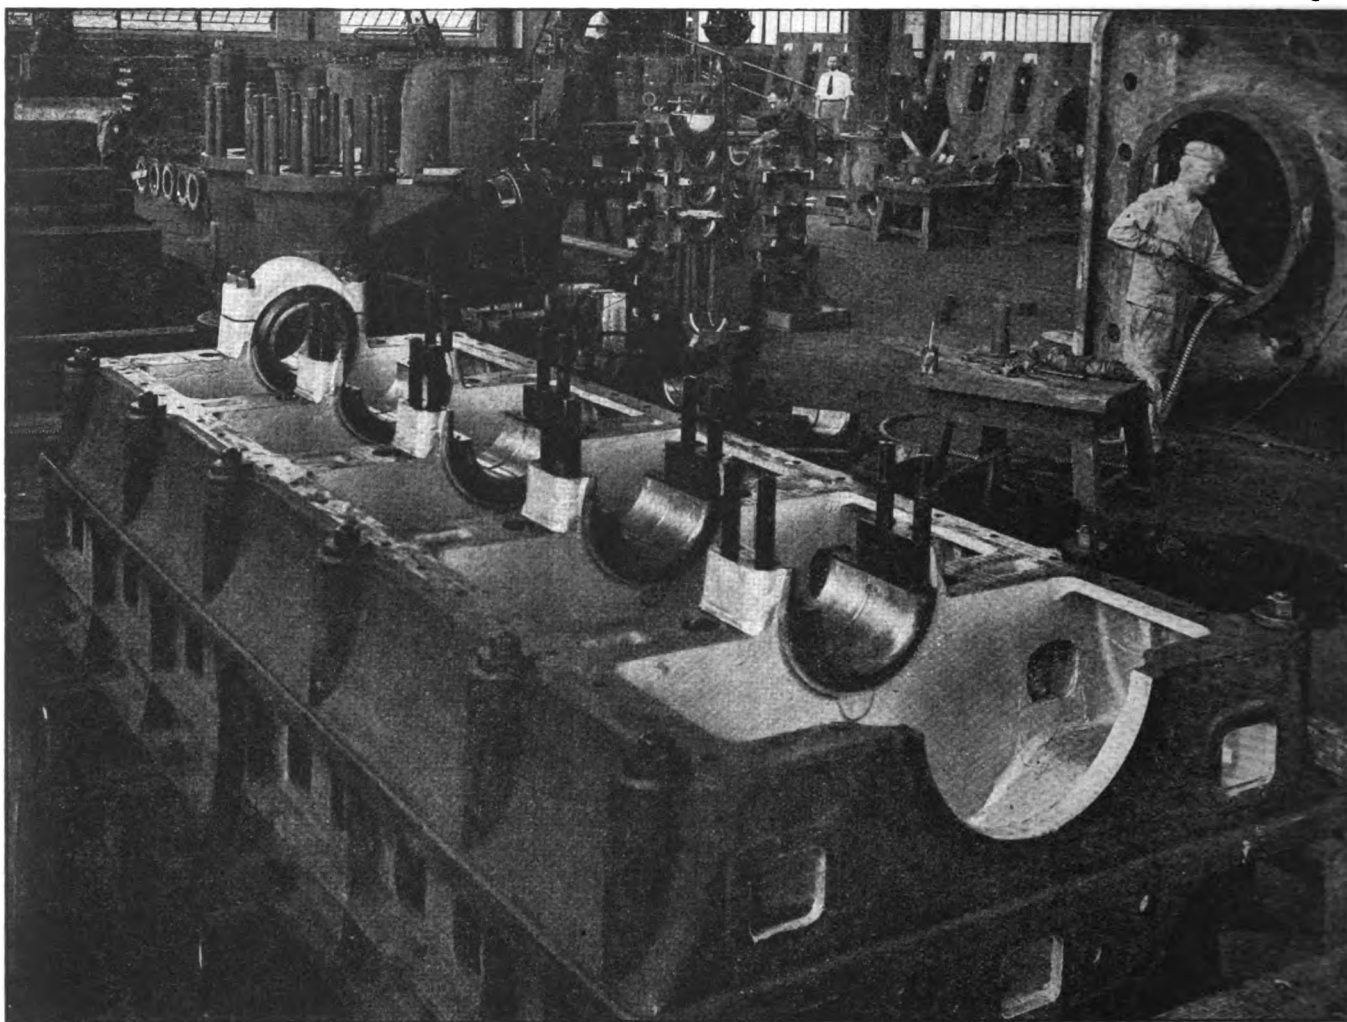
BED PLATE WITH LOWER BEARING SECTIONS IN PLACE—THESE ARE SCRAPED TO BRING THEM IN ALIGNMENT
